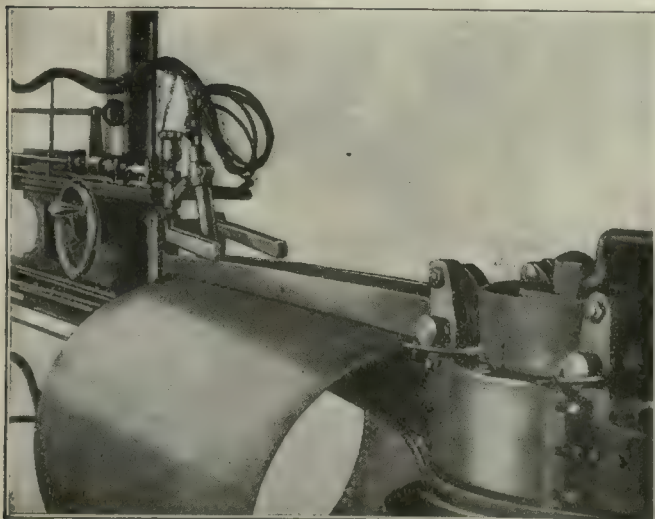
DRUM IN POSITION READY FOR WELDING
